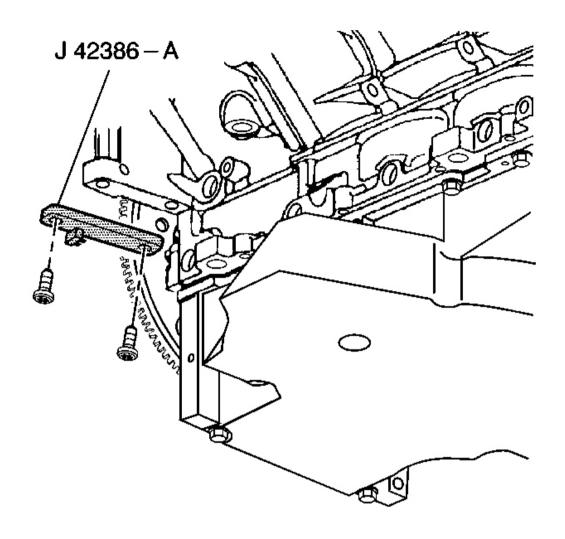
J 42386-A & Engine Flywheel Courtesy of GENERAL MOTORS CORP.
